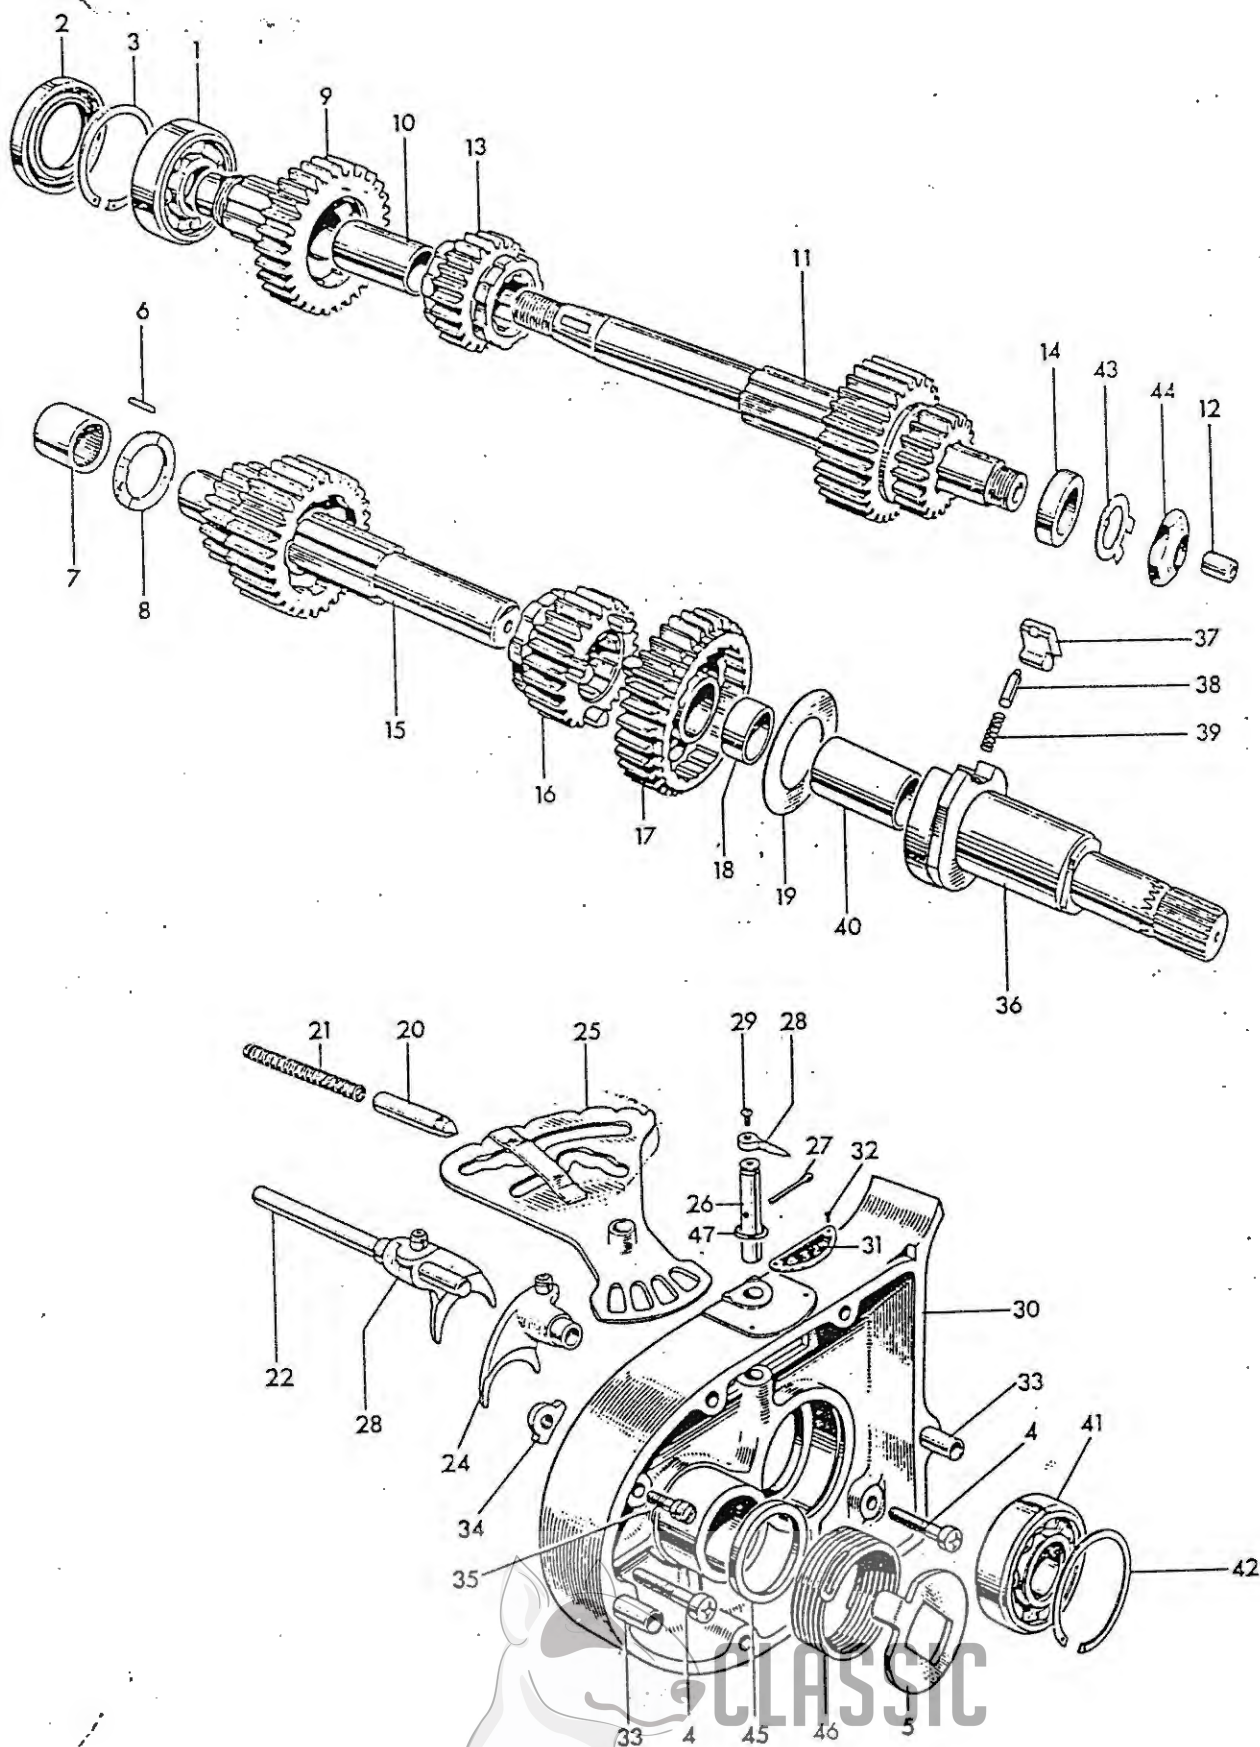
GEARBOX SHAFTS, BEARINGS AND INNER COVER
